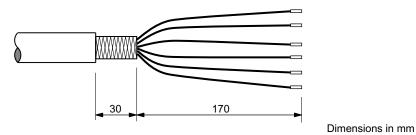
Exposure of the cable shield for cable assembly by the customer
